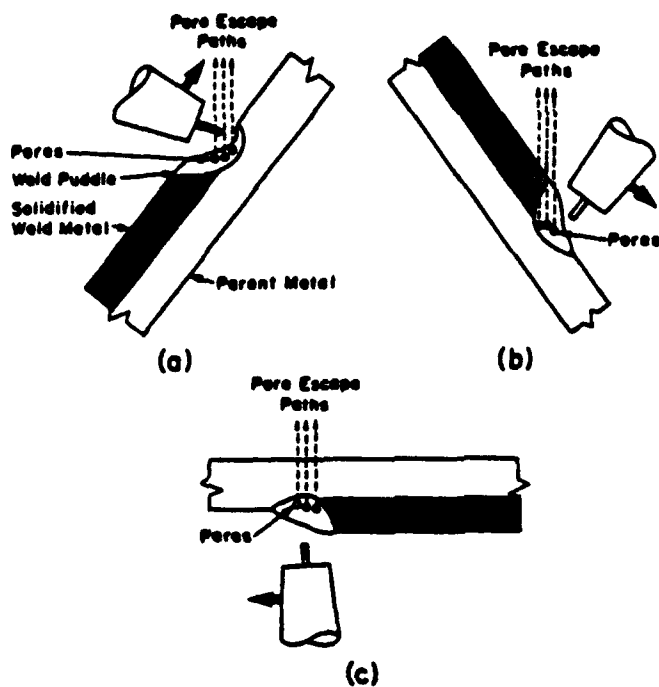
Effect of welding position and weld pool shape on porosity in (a) uphill, (b) downhill, and (c) overhead welds (Ref. 34).
